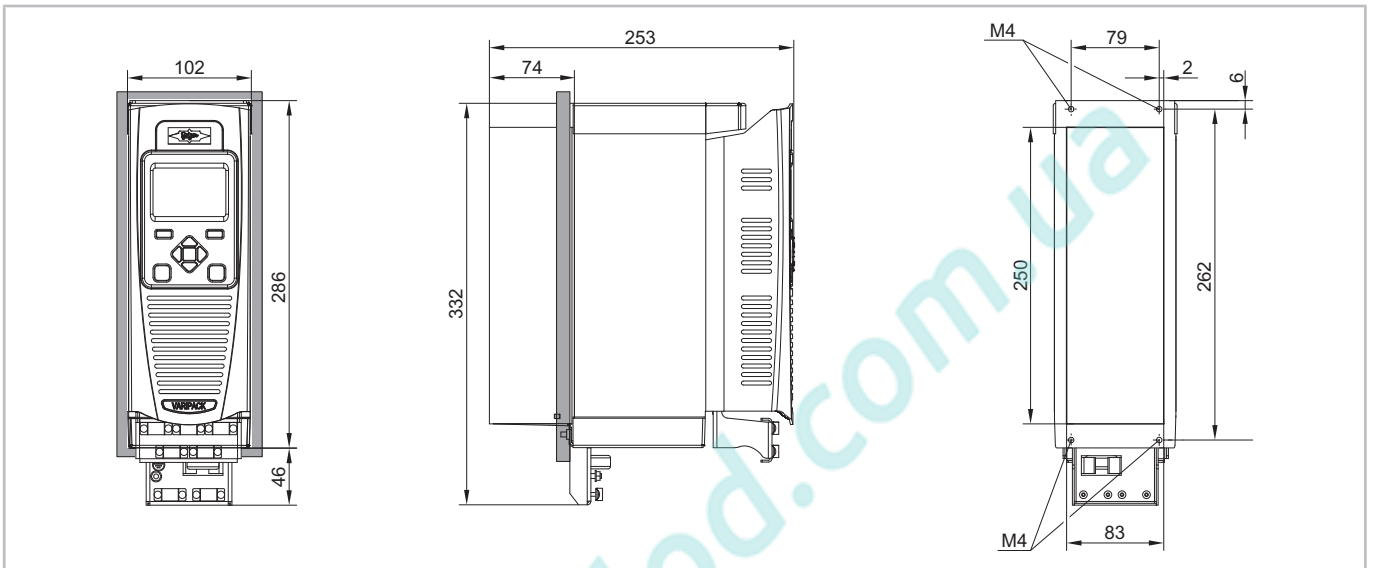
Dimensional drawing FDU+6, FDU+12 for through-switch cabinet mounting (with optional control panel)
